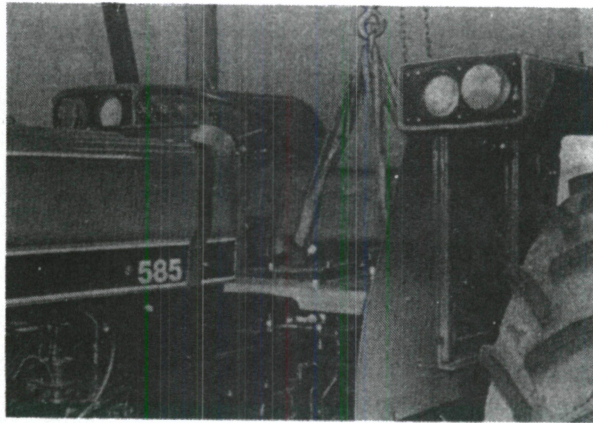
View showing sling and hoist used to lift off fenders, fuel tank and platform assembly.
